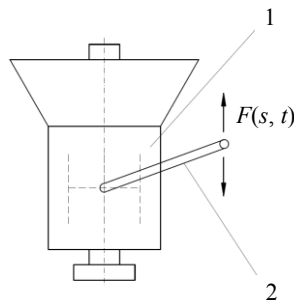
Schematic diagram (test principle) of a system to measure the static gear-change forces and to check the functioning of gearbox mechanisms: 1 – gearbox under test; 2 – gear-change lever; F – force on the gear-change lever knob at static gear changing; s – gear-change lever displacement; t – time
